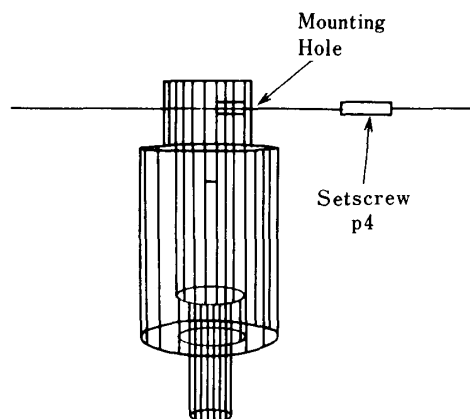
(a) Alignment and insert operation between a mounting hole and a setscrew.
